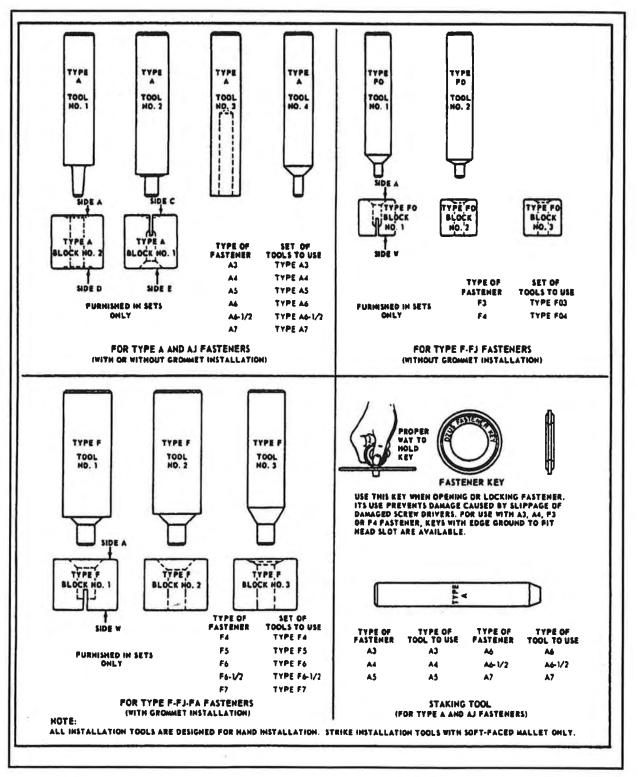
Installation tools for type A-AJ and F-FA-FJ Dzus fasteners
